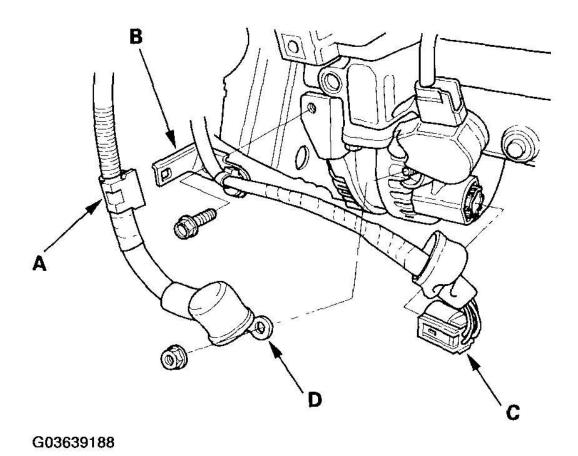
Removing Harness Clamp And Bracket Courtesy of AMERICAN HONDA MOTOR CO., INC.
